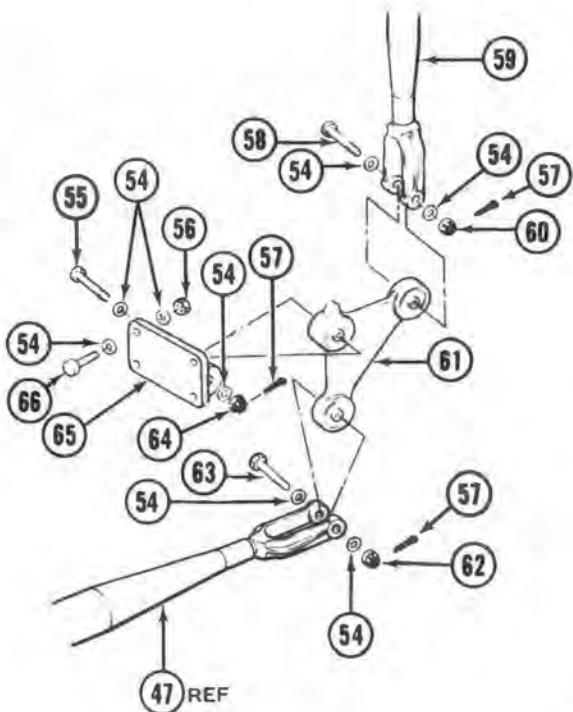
Cyclic control system (bellcranks, levers, supports, and control tubes) — removal and installation
